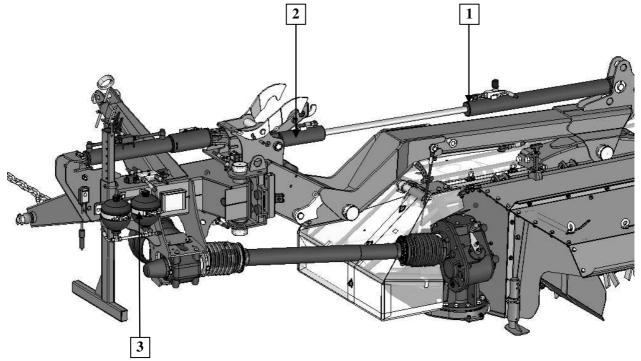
Parts of SaMASZ rear disc mower with hydro-pneumatic support (all KT disc mowers)
